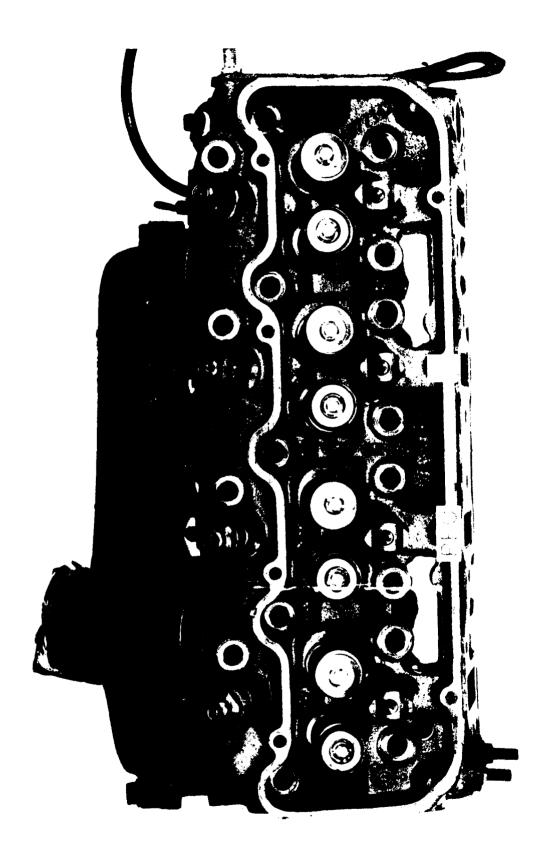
Photographs of GM 6.2L Engine Parts After 3-Year Storage
